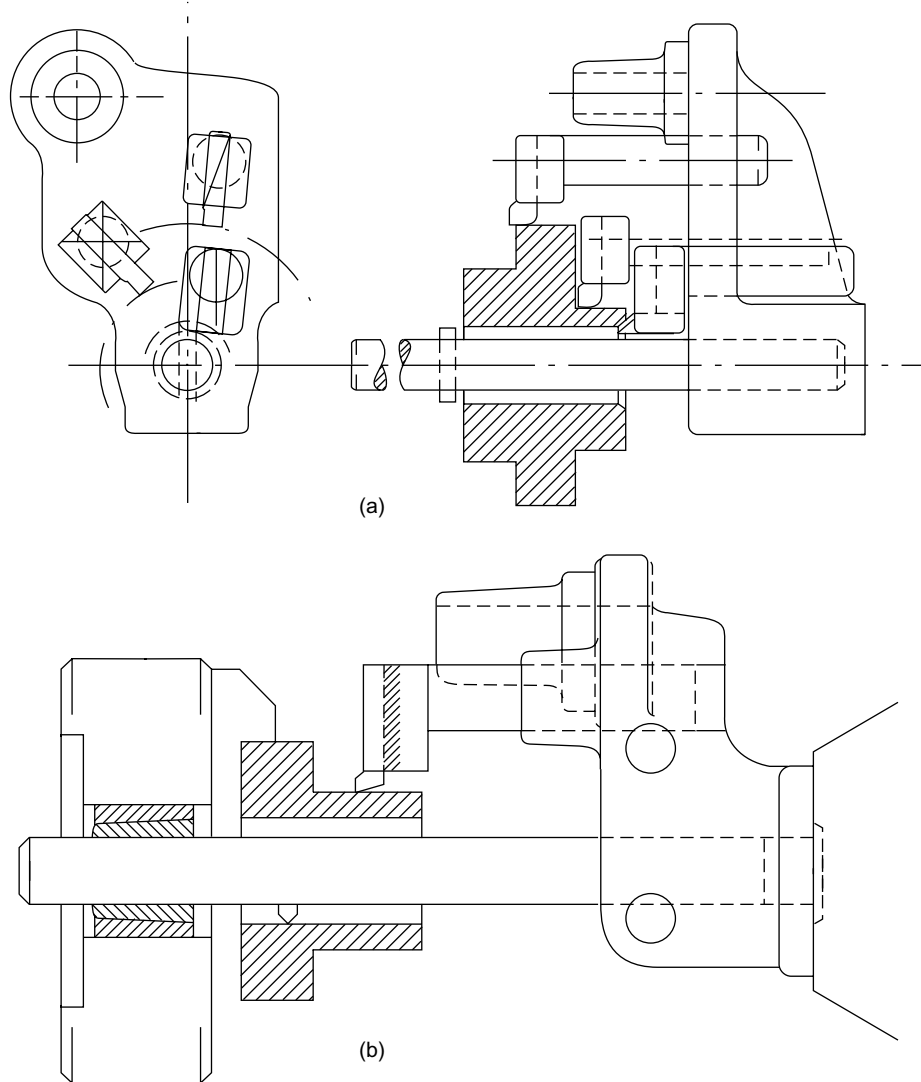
Different forms of collet chucks used in turret lathes
